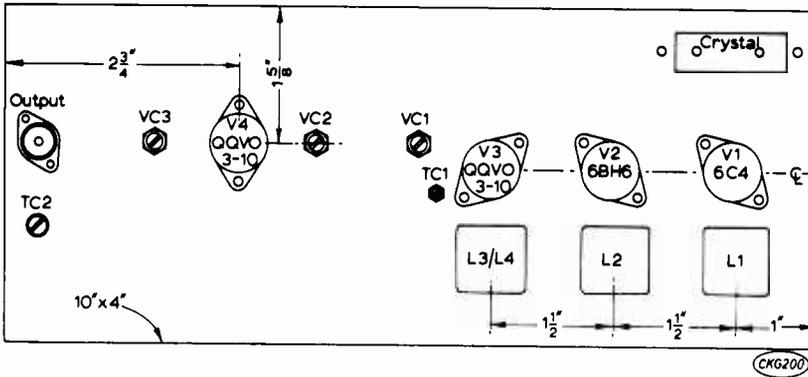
Marking-out details on top of the chassis. Holes for the single tag stand-offs can be drilled as construction proceeds.
